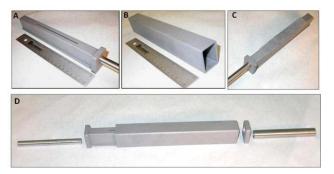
HX-channel components made of Mo prior to assembly: (A) internal He-supply tube, (B) external tube, (C) internal He-supply tube with Mo-foam covering the He-exit slot, (D) partially assembled HX-channel.
